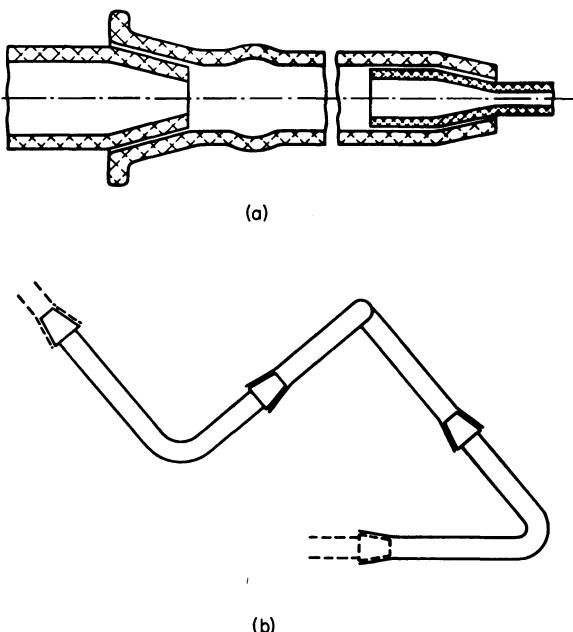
Tapered joints allowing motion: (a) sliding, (b) bending
